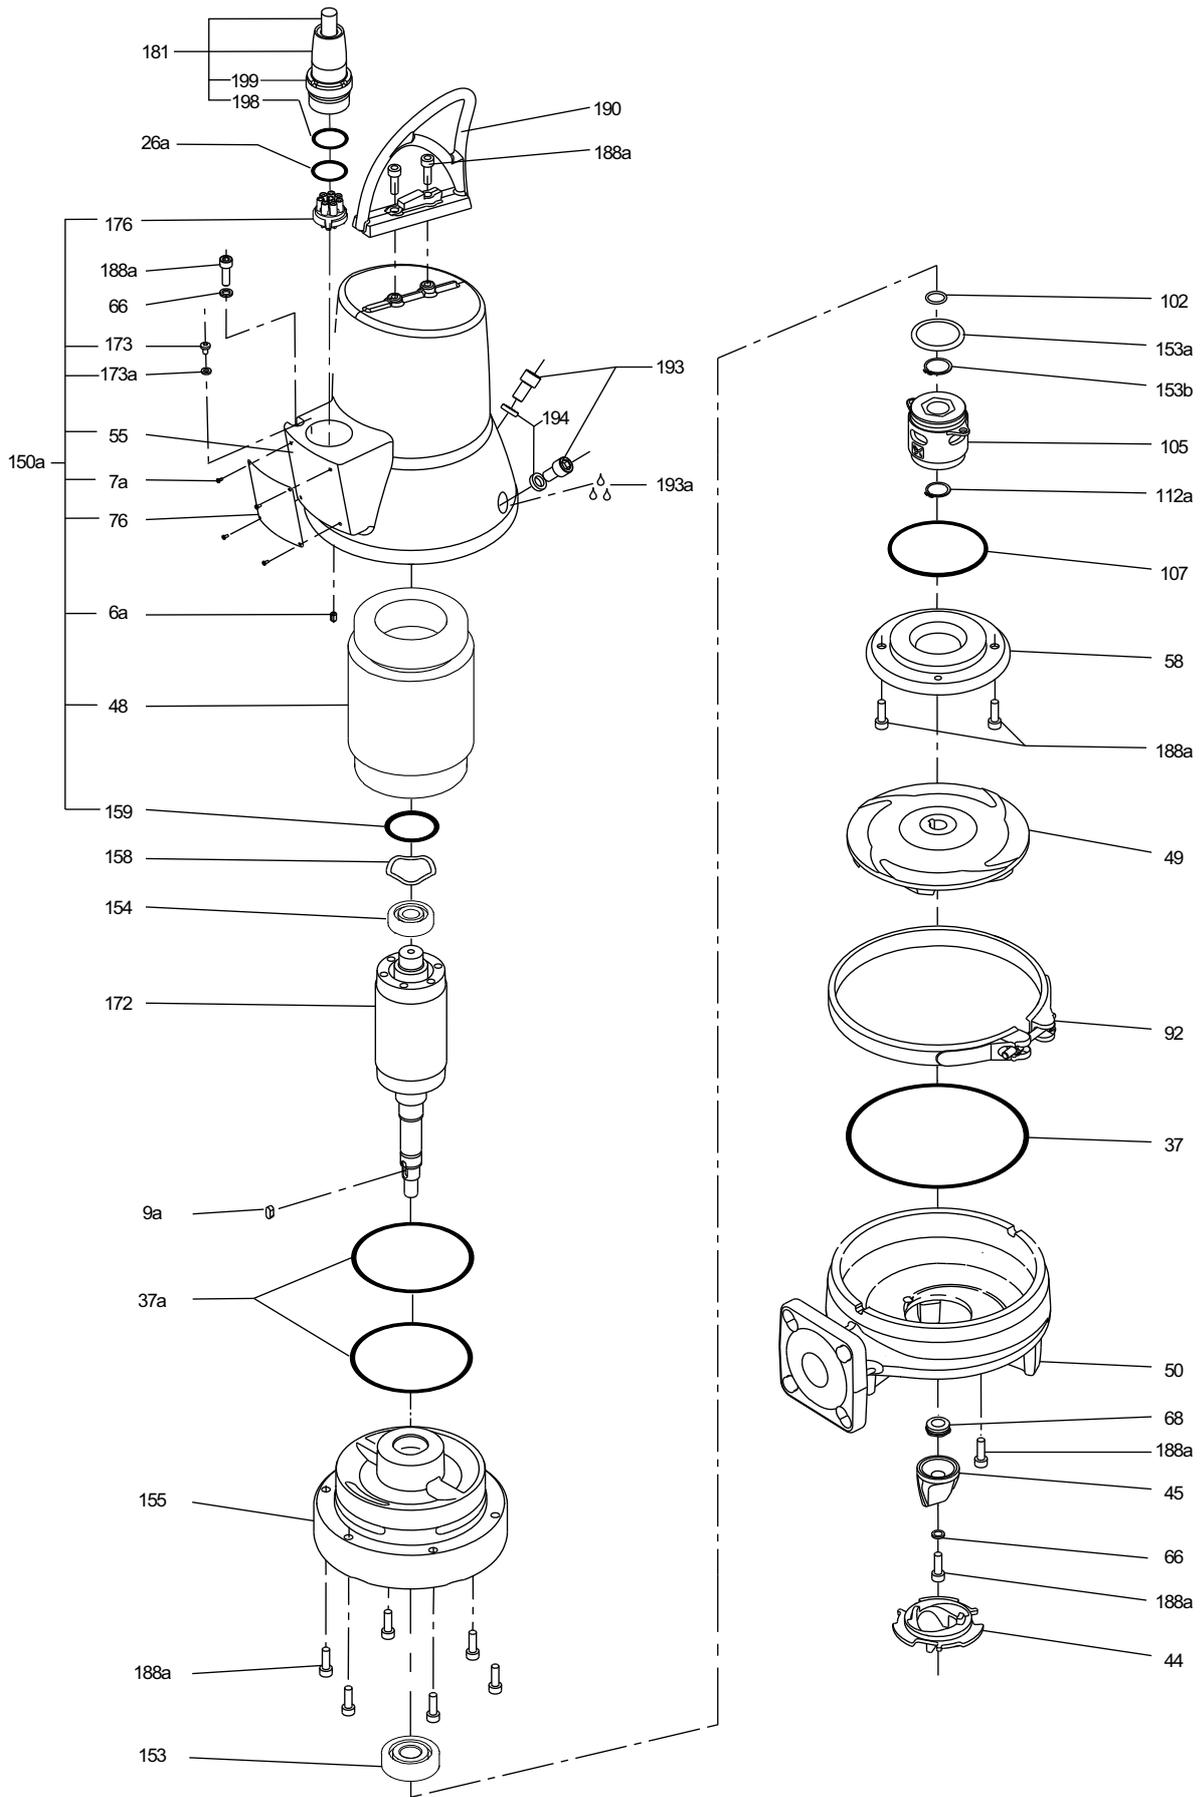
Exploded view of SEG pumps, 2.6, 3.1 and 4.0 kW
